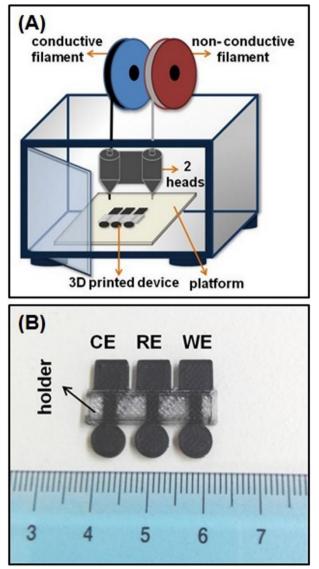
(a) Schematic illustration of the3D-printing processing of a 3D printer equipped with two heads. (b) Photograph of the 3D-printed integrated device. (Reprinted from [24] with permission of Elsevier).
